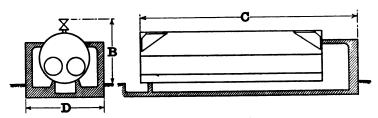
LANCASHIRE BOILER. Shell, 8 ft. 6 in. dia., 80 ft. long; two internal furnace tubes, each 3 ft. 6 in. dia.
